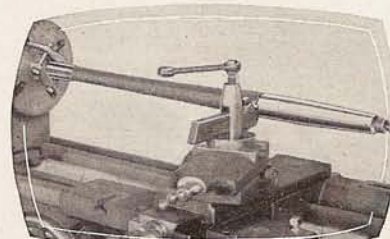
Making an Emergency Replacement Axle Shaft Complete in the Lathe
